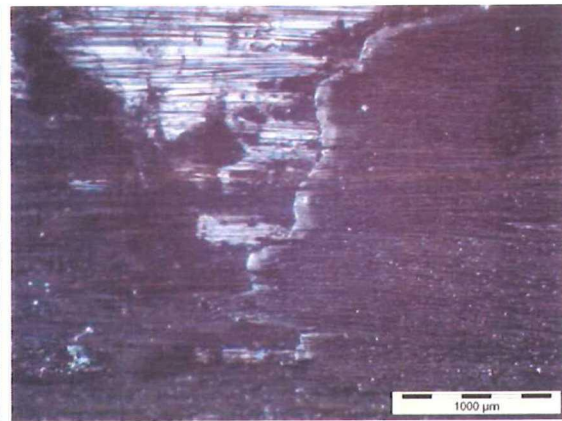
First ply failure at fracture surface of sample clip welded at 700 [J]. Fibers stick out of broken lamina.
